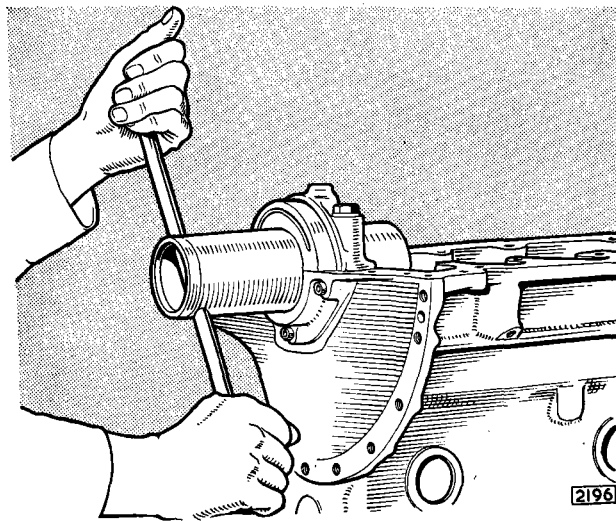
Sizing the rear oil seal with the Churchill Tool No. J.17.
